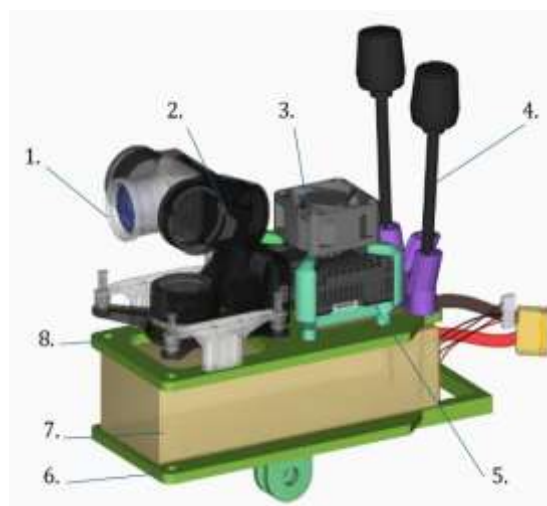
3D Assembly models of the proposed wheelchair assistance system: 1) camera, 2) three axis stabilizer, 3) cooling fan, 4) antennas, 5) Dji O4 Air Unit Pro module, 6) mounting frame, 7) battery, 8) main frame
